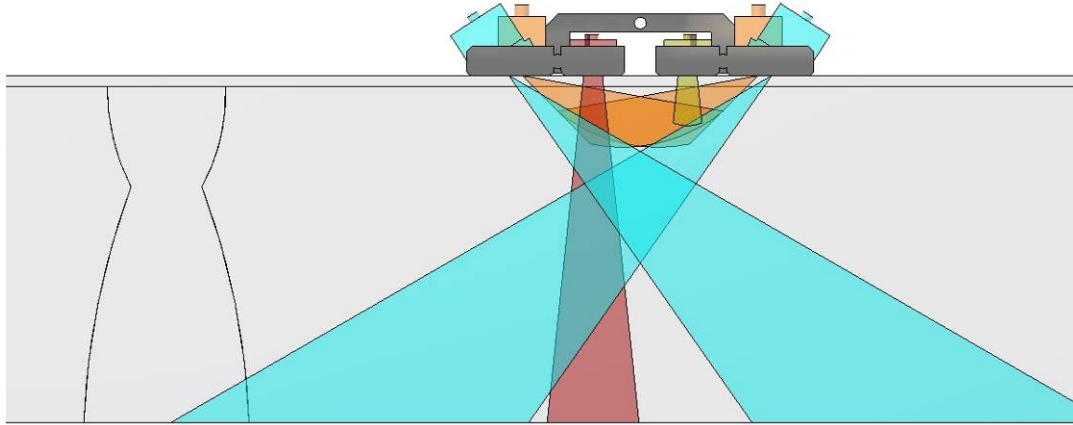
Circumferential Welds Inspection PA Probes Arrangement
